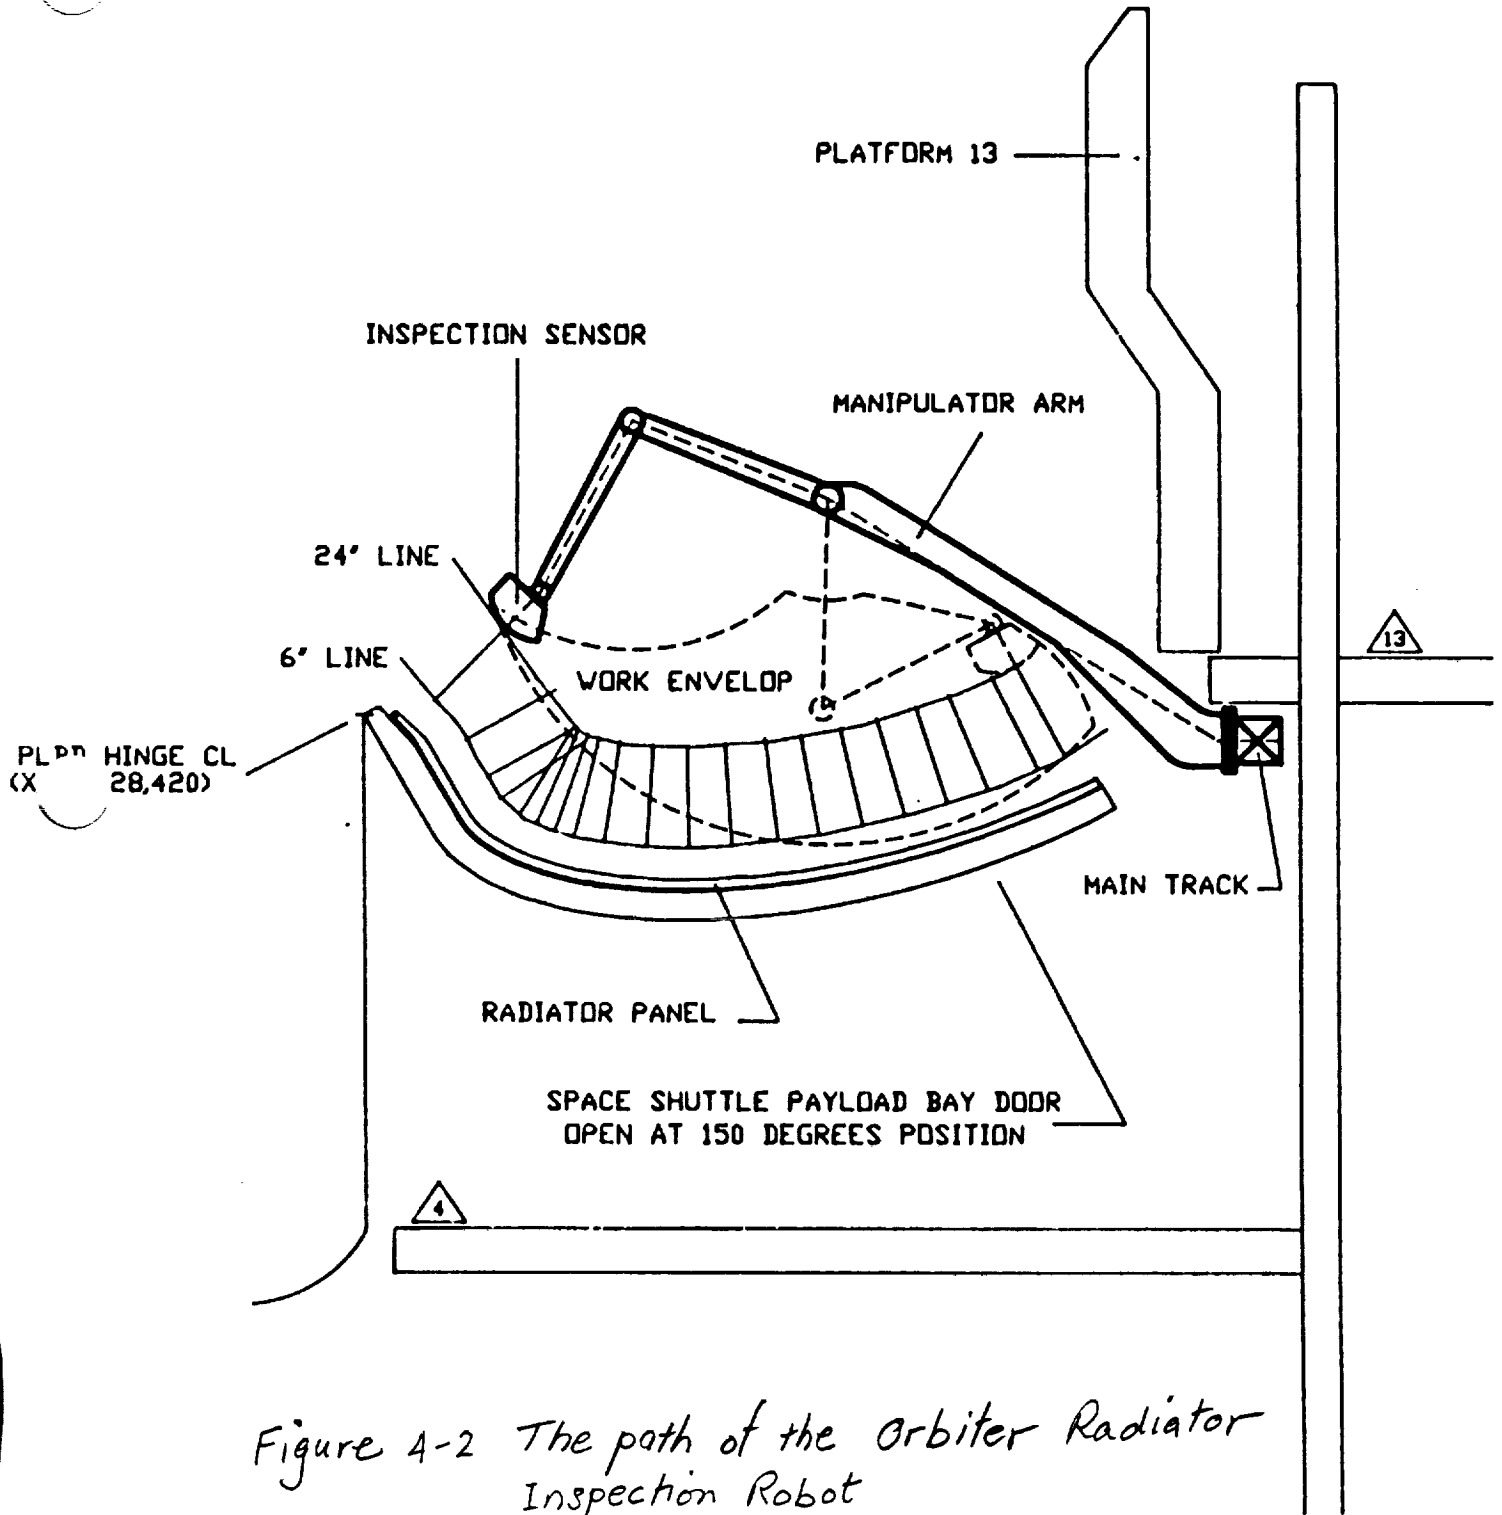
The path of the Orbiter Radiator Inspection Robot
